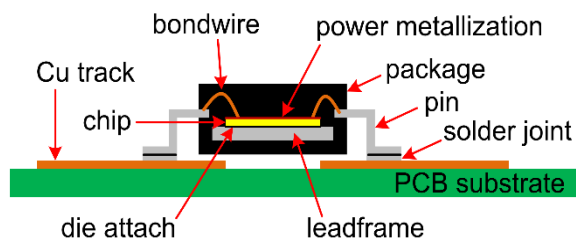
A schematic view of a packaged device mounted on PCB with indication of some typically modeled features.
